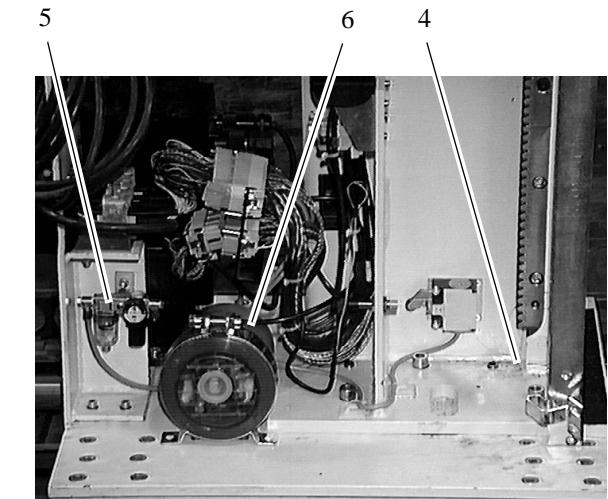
Lube Cartridge on Carriage (new systems)
